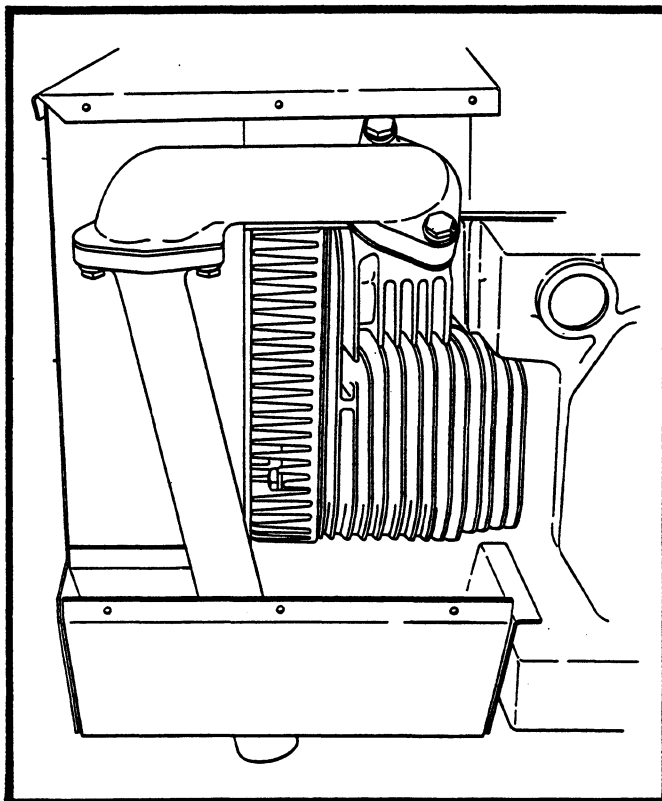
EXHAUST ELBOW AND TUBE LOCATION
